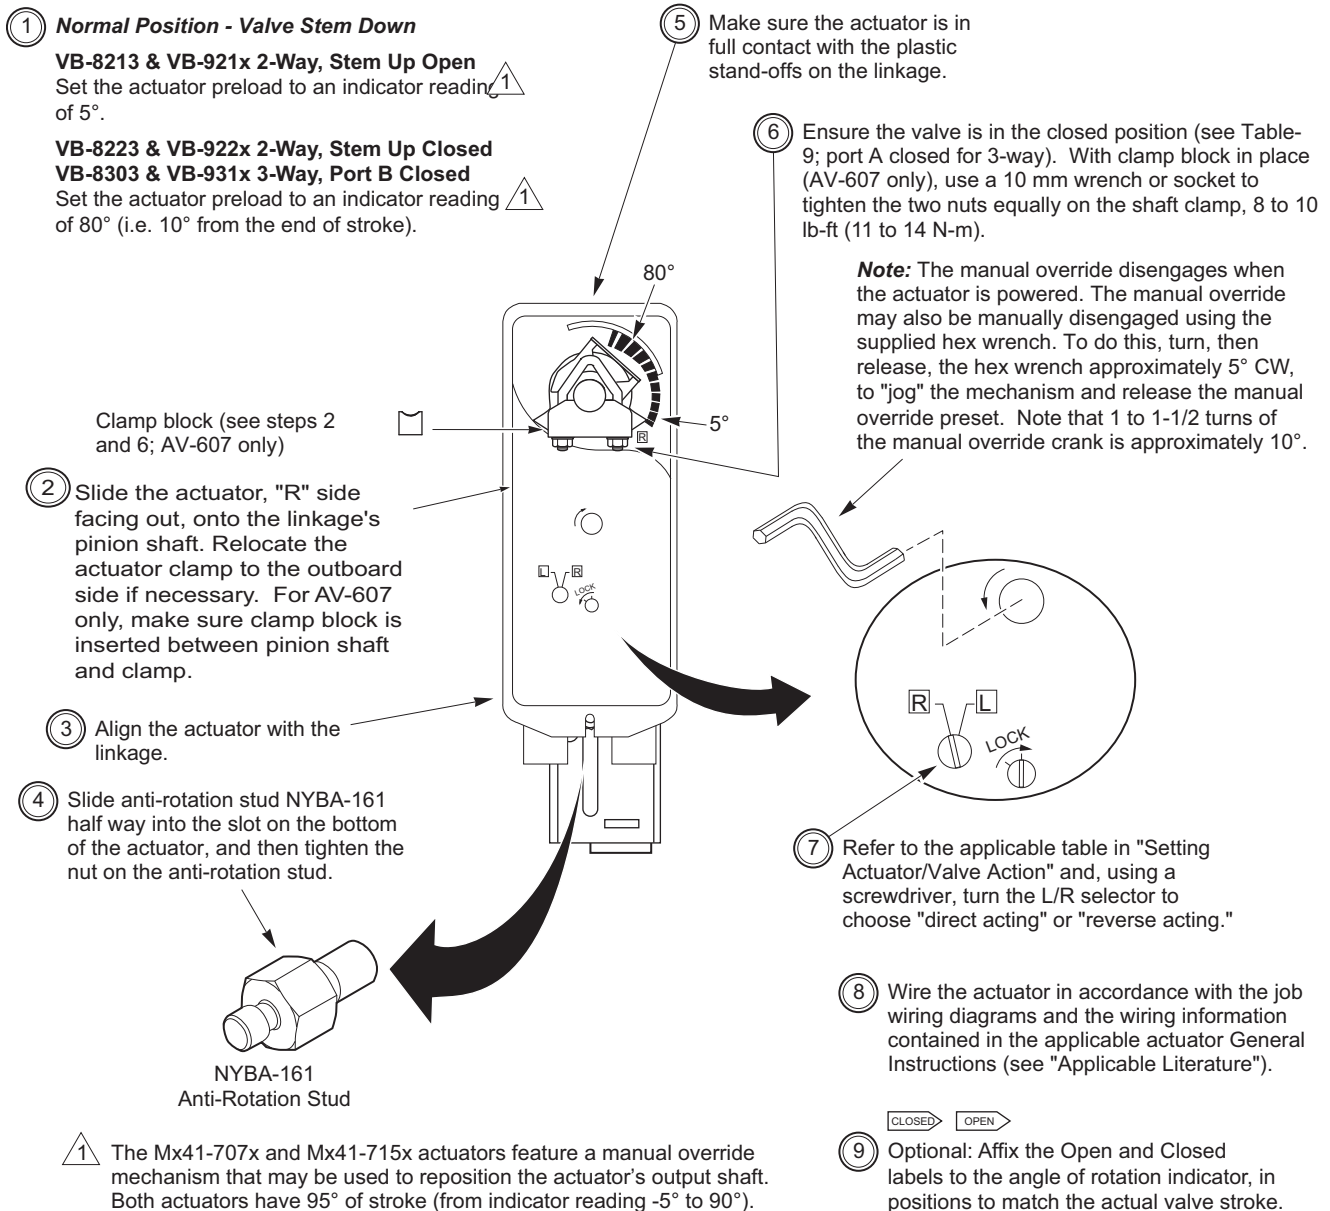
Mounting Mx41-707x or Mx41-715x and Setting Up Actuator/Linkage/Valve Assembly.
